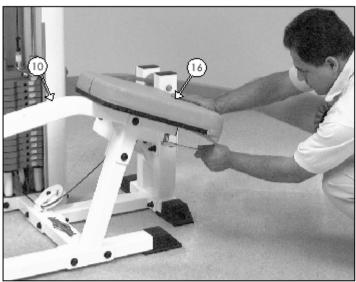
Affix the Thigh Support Pad (#16) to the Main Frame (#10) using three Hex Head Cap Screws 3/8-16 X 3 1/4 (#58), and three Flat Washers SAE 3/8" (#46).
